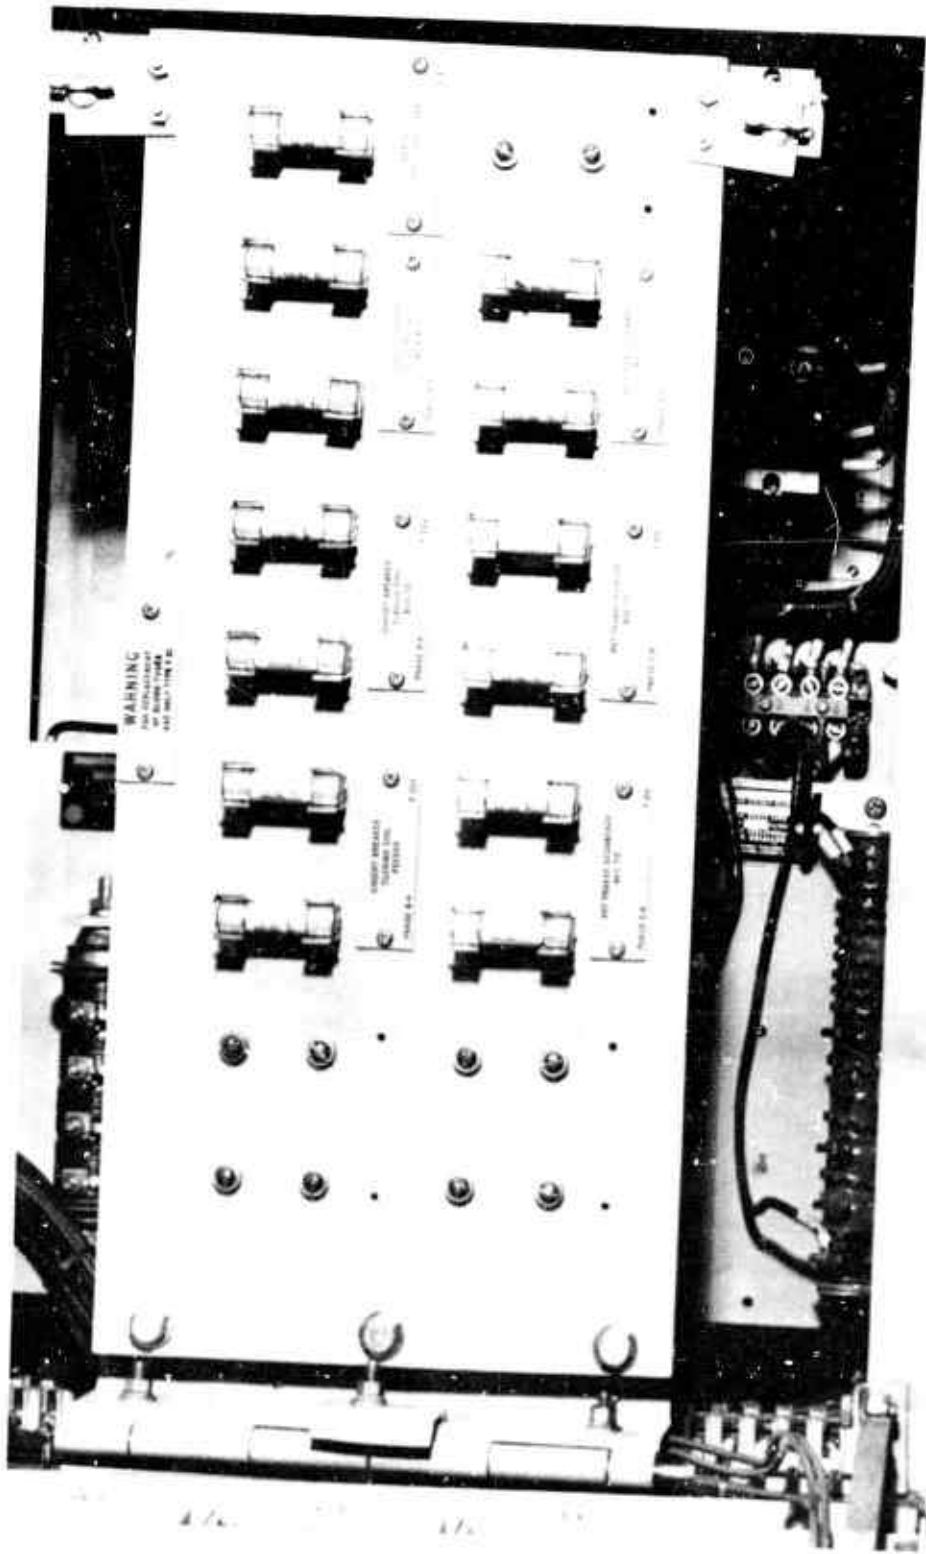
Damage from Shock Test - Fuse Compartment. Note slippage of fuse panel hinge and travel of hinge pin.
